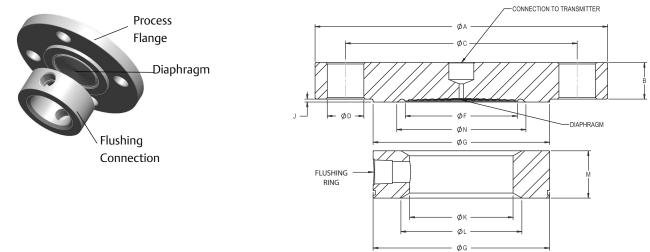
FFW Flush Flanged Seal - One-Piece Design (shown with flushing ring)
